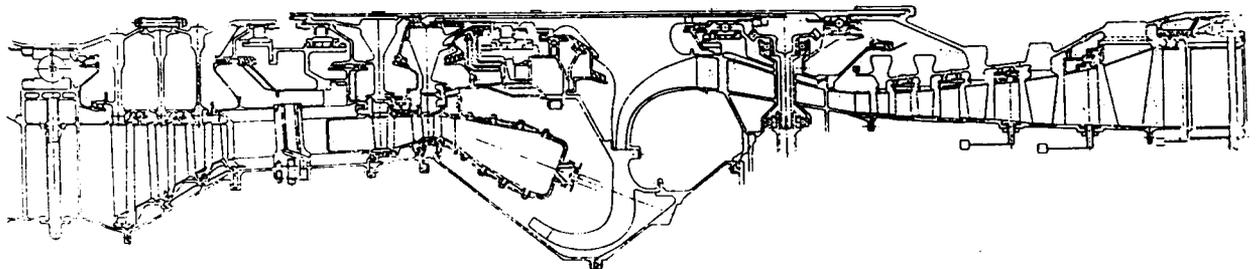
Mechanical Cross Section of the Reversed Three-Spool Axial/Centrifugal Engine - In this reversed configuration, the turbine is located at the front and the compressor at the rear. A turbine intermediate case bearing support strut system is used to support the back end of the power drive turbine. (J27638-911)
